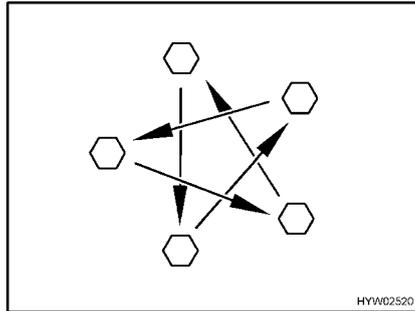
Tighten the wheel nuts or wheel bolts cross-wise
